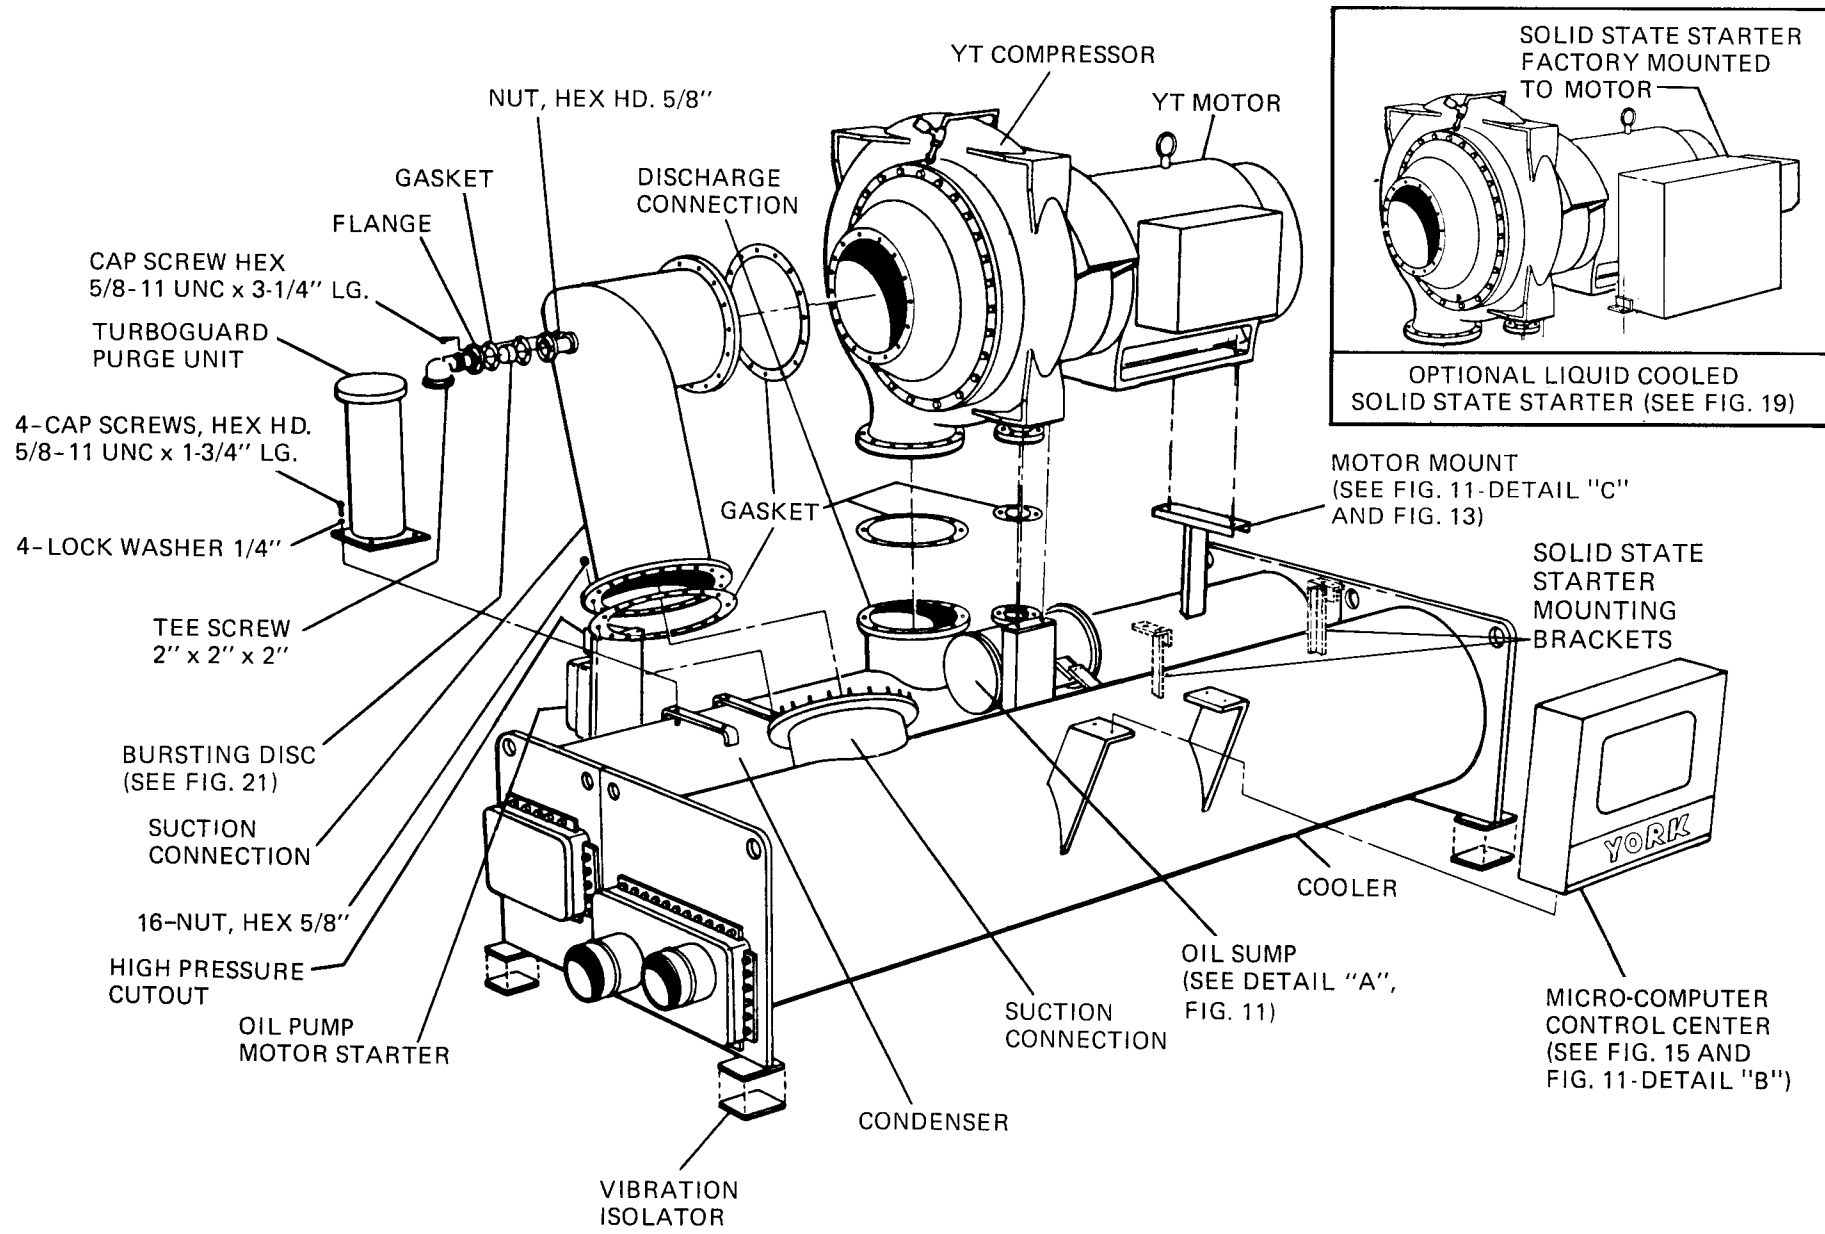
MODEL YT CODEPAK EXPLODED VIEW ASSEMBLY (YT G1 G1 E1 THRU YT L3 X3 E3)
